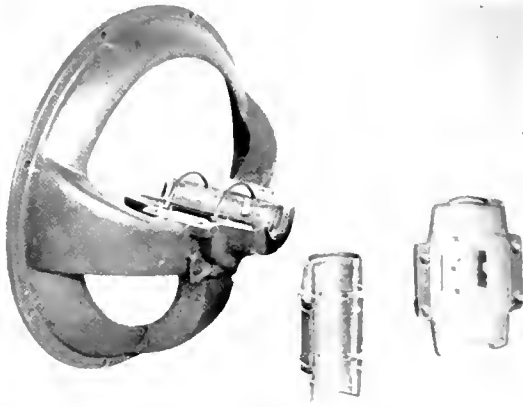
End Shield showing the Ease with which the Bearing Can be Dismantled
